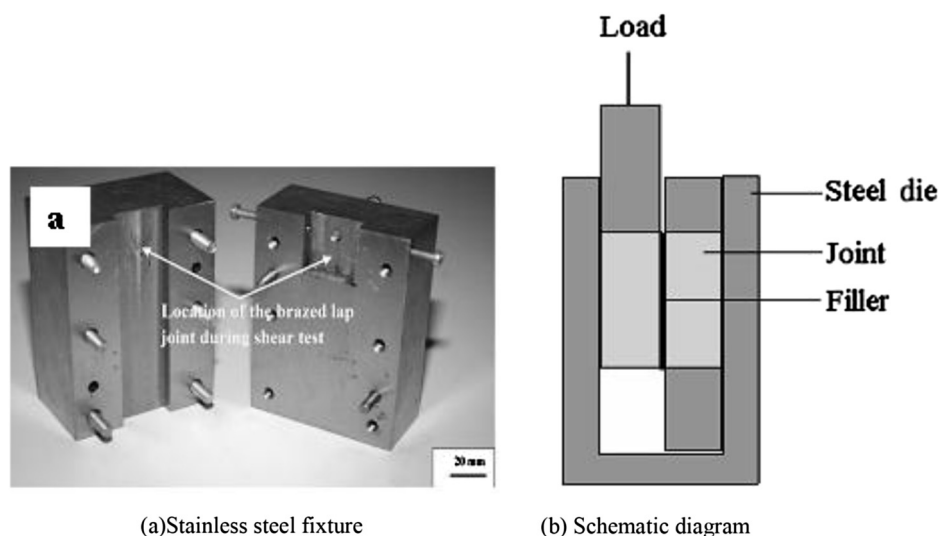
Stainless steel fixture and its schematic diagram used to test the shear strength of the welds.
